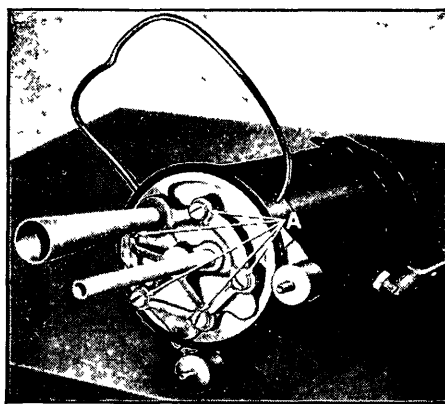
Pump cover attaching screws "A" on Moraine pump
